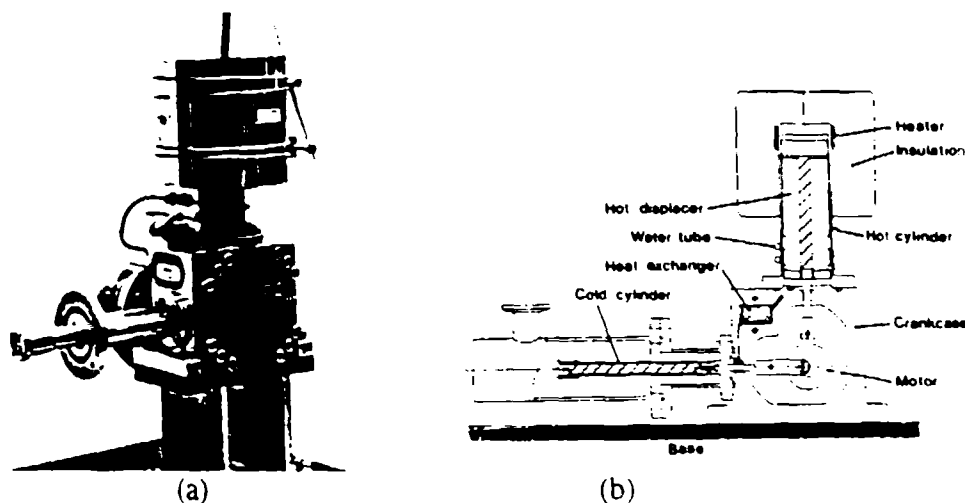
External view and cutaway sketch of Vuilleumier cryocooler.
